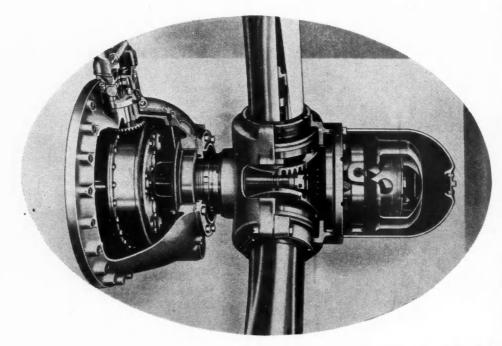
Cutaway view of Hamilton Standard Hydromatic propeller and constant-speed governor installed in the nose section of a Pratt & Whitney engine
